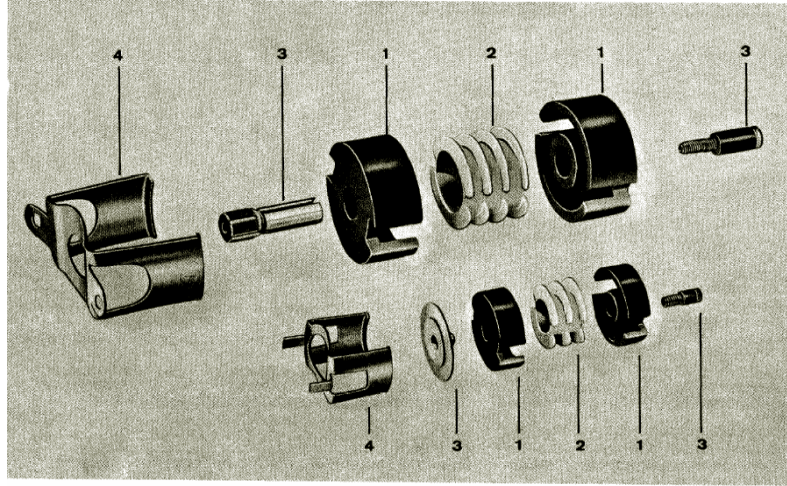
Sub parts of high ferrite inductor with the 2 matched pot core halves (1), bobbin on which the coils are wound (2), tuning assembly (3) and the clamp for holding the core halves together (4).
